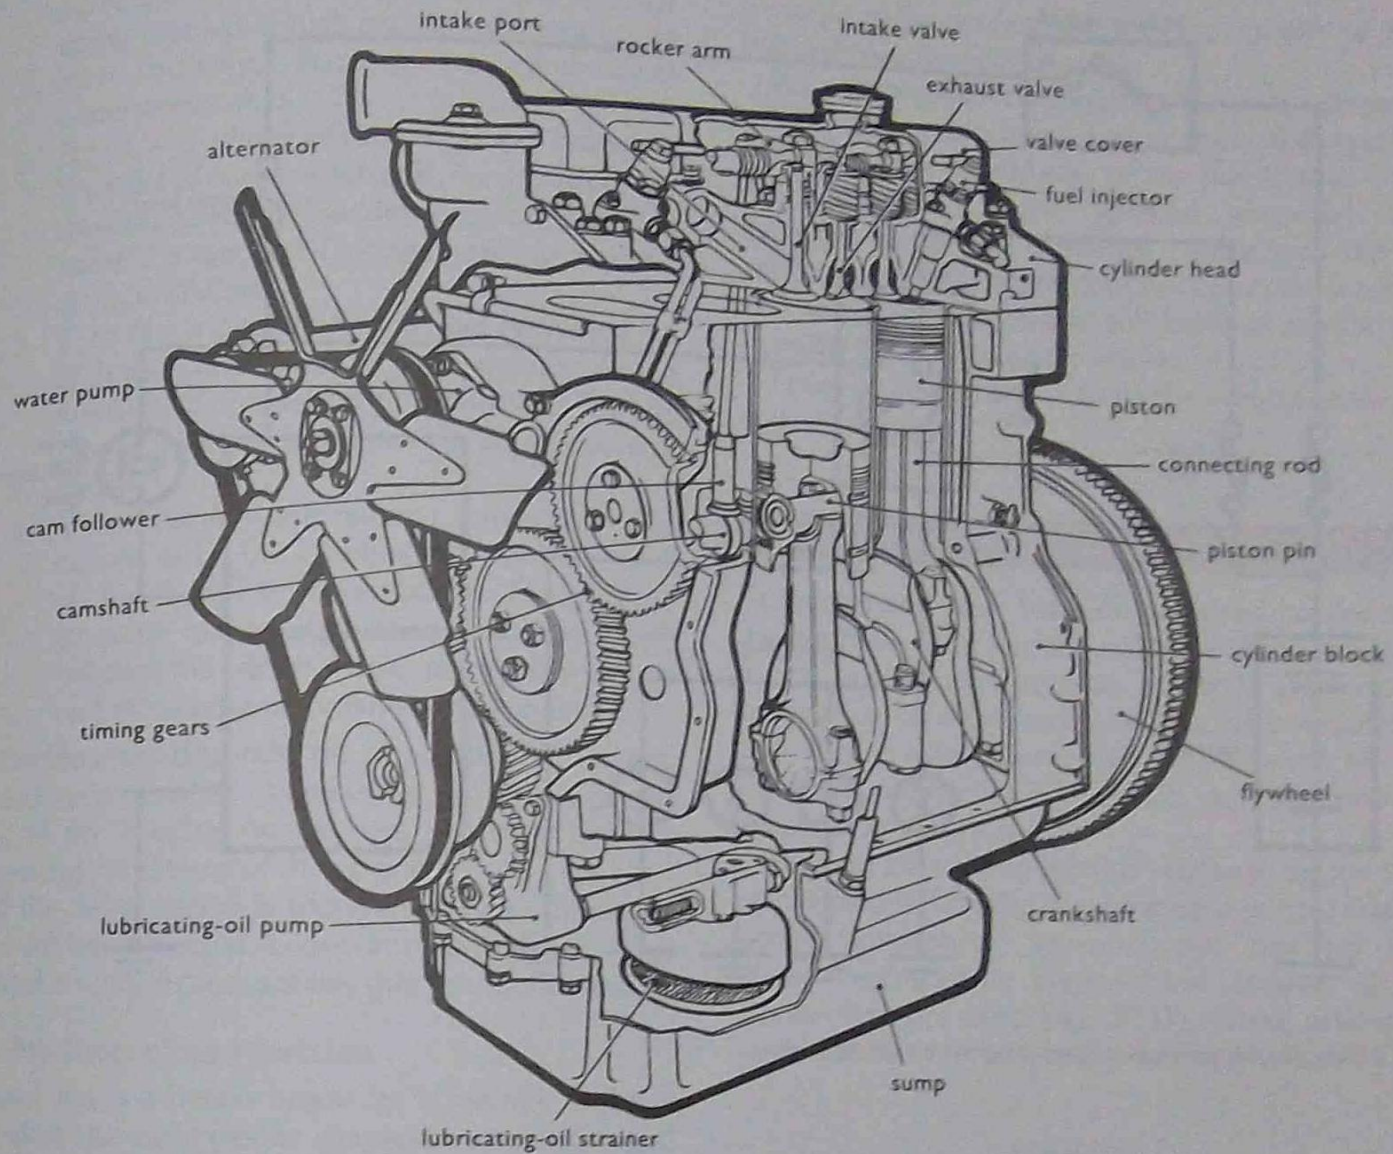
Basic diesel engine with direct injection; this is a larger engine PERKINS
